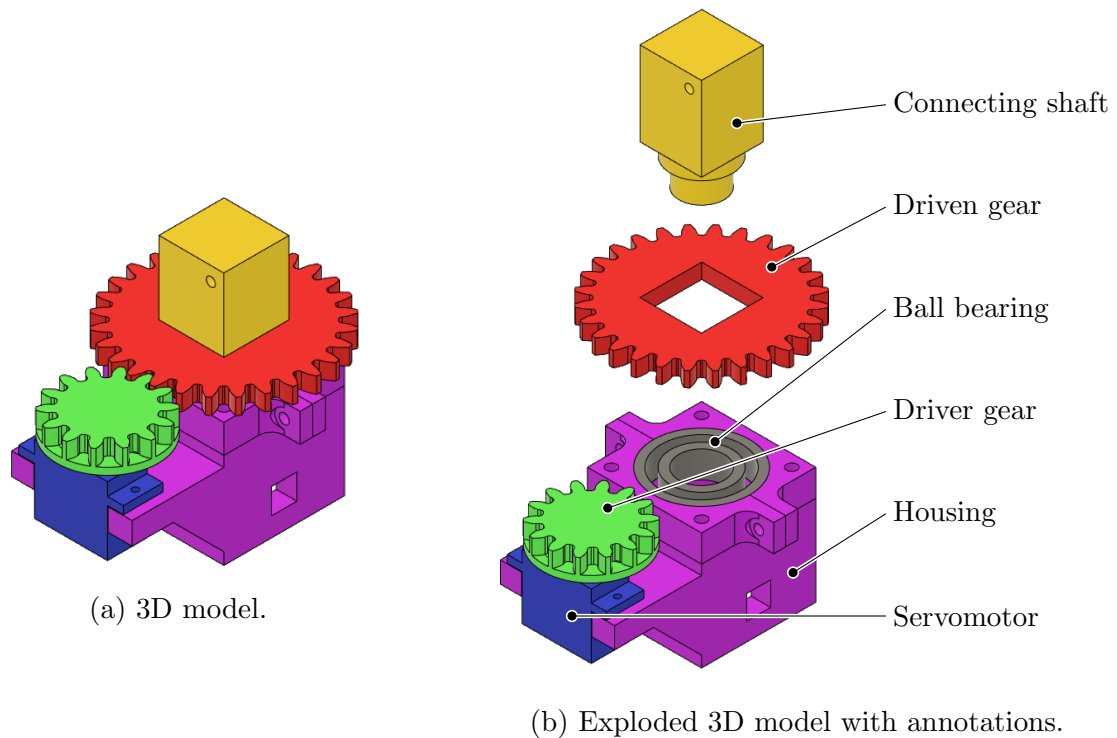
Assembled (a) and exploded (b) 3D models of the Pivot Mechanism. A bearing is pressure fit into the housing, allowing for its inner ring to freely rotate. The driven gear is secured to the connecting shaft which is pressure fit into the bearing's inner ring. A servomotor, secured to the housing, rotates the driver gear which causes the bigger gear (red) to rotate. The connecting shaft is fitted inside the Launch Unit.
